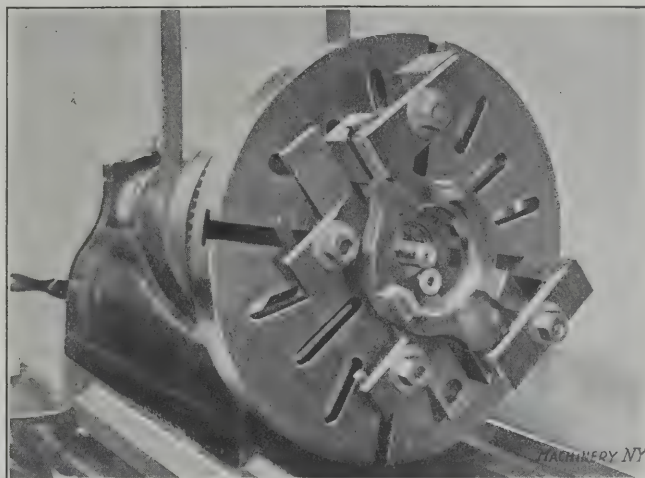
Use of Central Plug and Ring Gage for Sizing Projections located 120 Degrees apart
